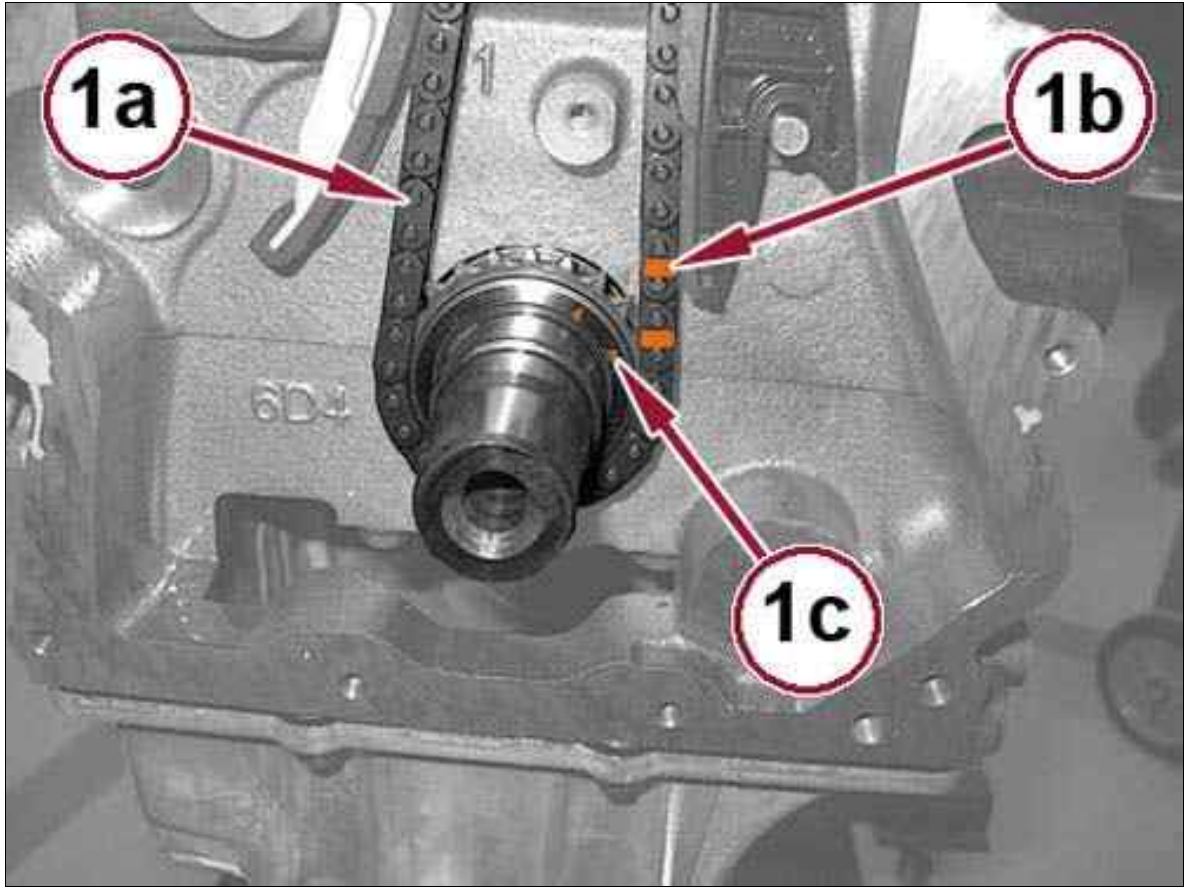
Rotating Crankshaft To Position Pin At Bottom To Ensure Triangles On Timing Chain Control Gear Are In Correct Position
